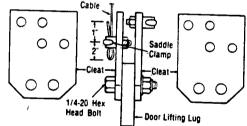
ATTACHING DOOR CABLE TO CLEATS.
